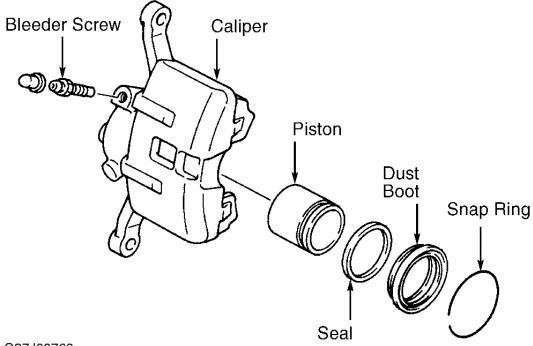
Exploded View Of Rear Caliper Assembly (Miata & Protege Shown; MX-6 & 626 Are Similar) Courtesy of MAZDA MOTORS CORP.
